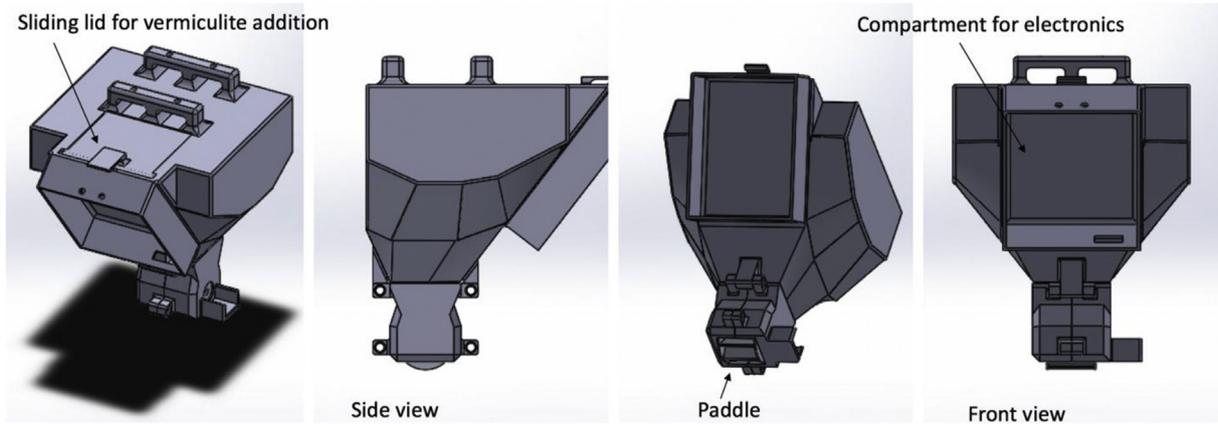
CAD drawing of our Bugbot dispenser design.
